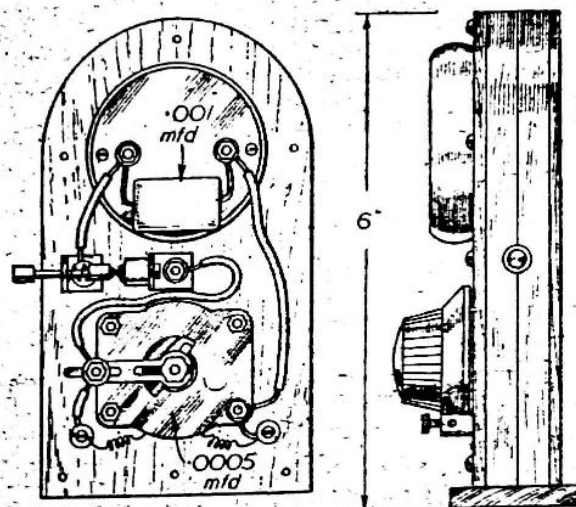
Back view showing wiring with side elevation of the completed receiver.
